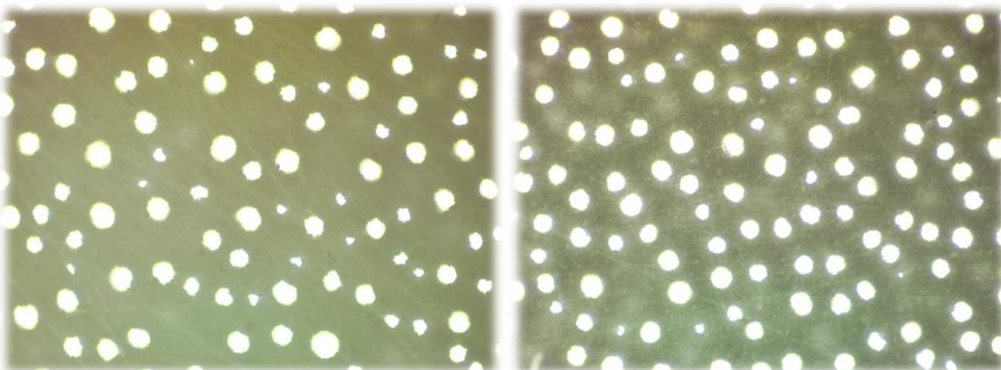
Pictures with 10x lens of bottom surface with 79 and 107 μ m of material removal.
